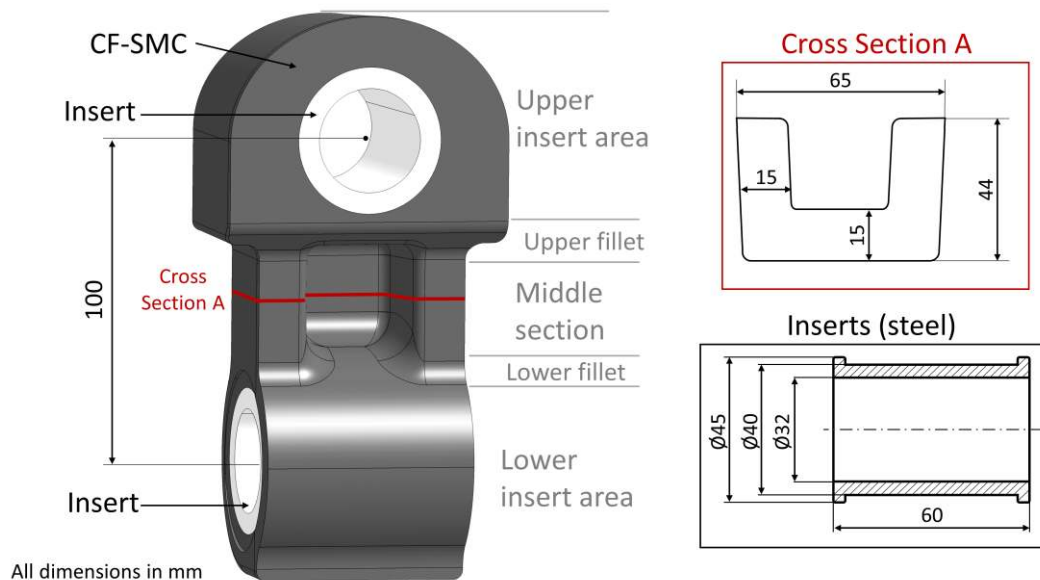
3D image of the geometry demonstrator, derived from an actual chassis part. Cross-section and inserts dimensions are specified (in mm).
